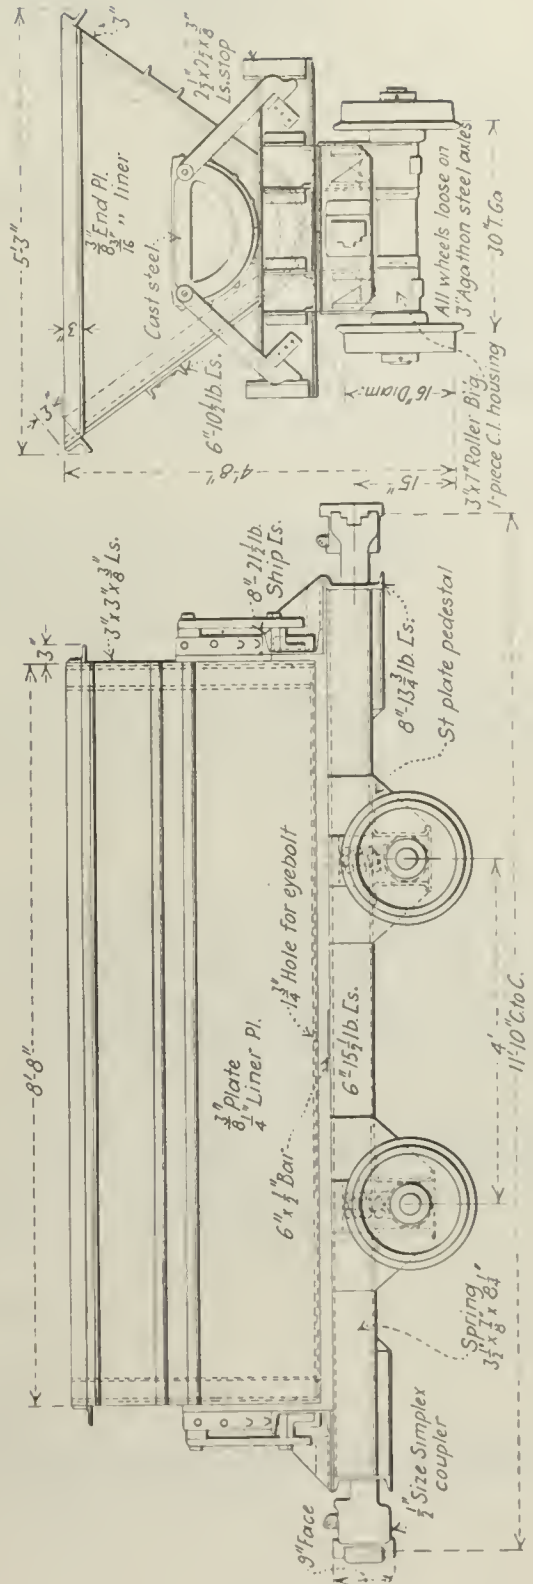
Sketch of 76-cubic-foot rocker-dump ore car used on main-line tracks
